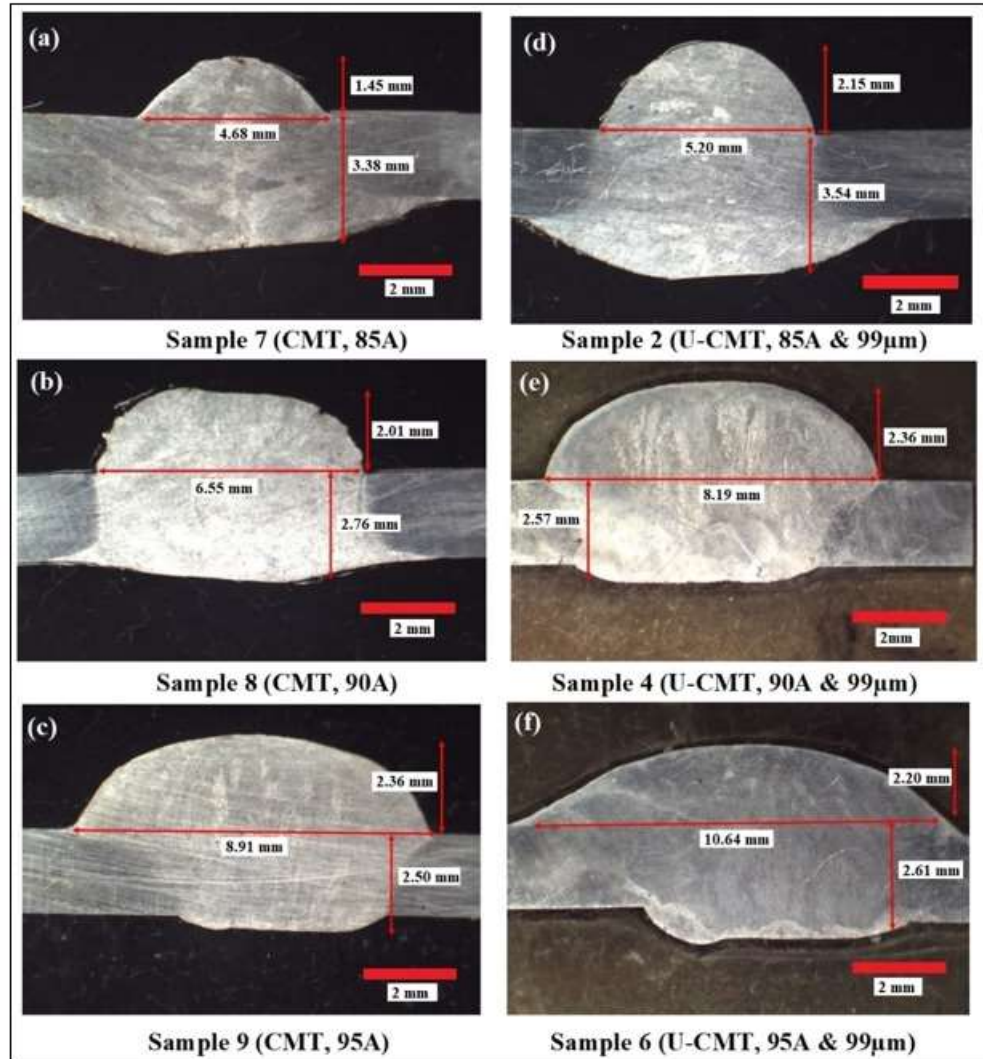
2 Variation in macro images of weld bead geometry of CMT and U-CMT welded samples
